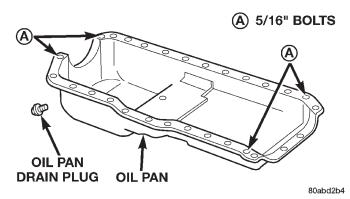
Position of 5/16 inch Oil Pan Bolts
